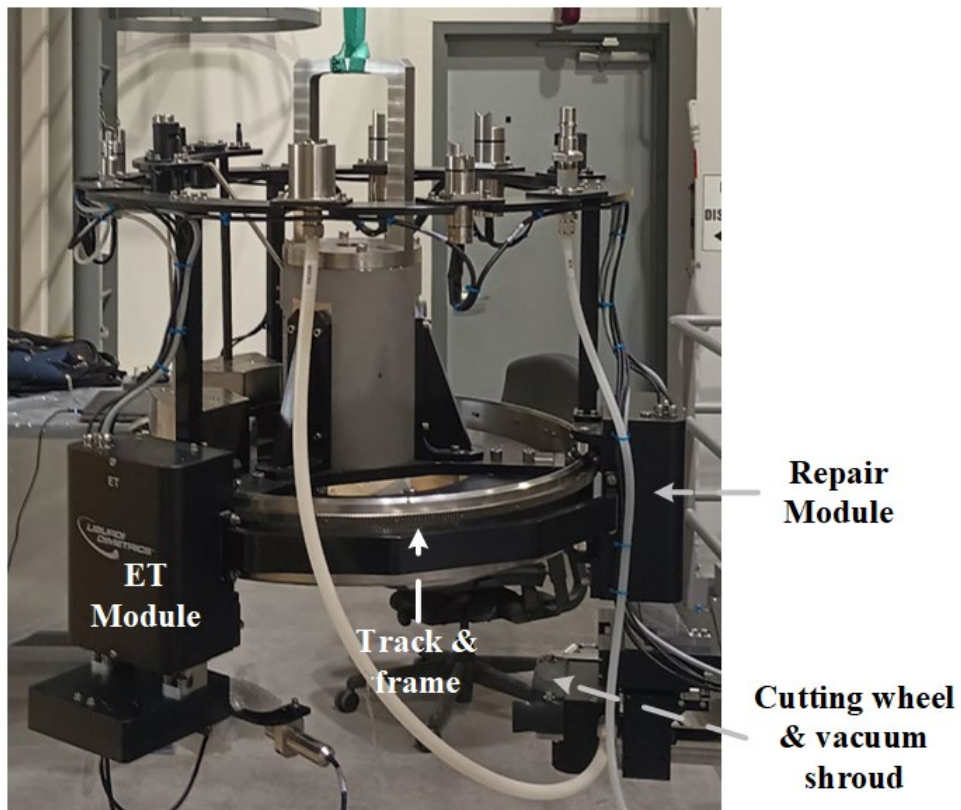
RRDP remote canister closure system platform number 2 (circumferential weld repair platform) suspended from rigging attachment point.
